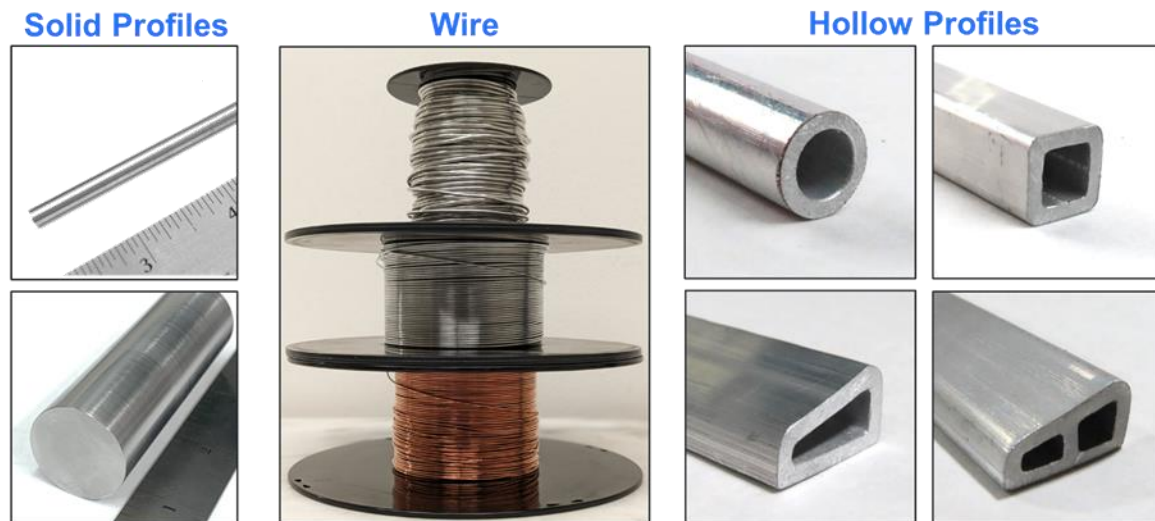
Example Extrudate Geometries Produced Using ShAPE
